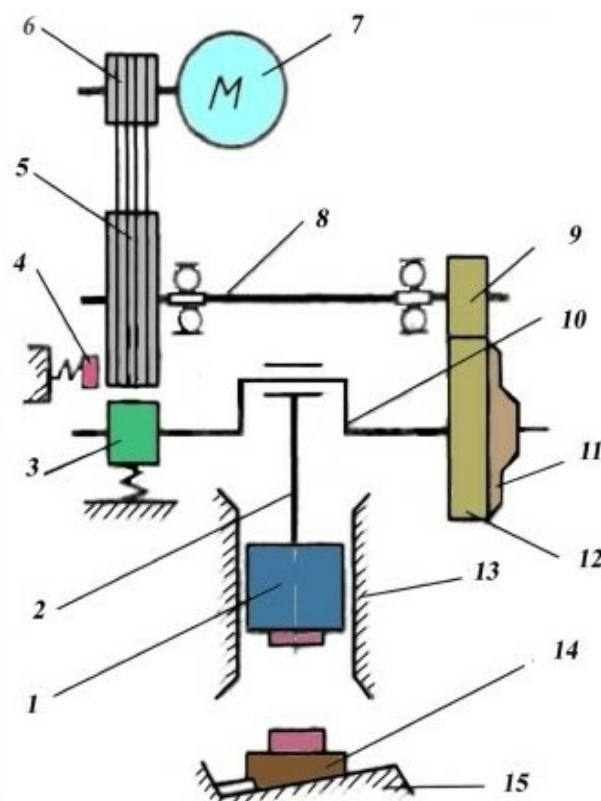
Structure scheme of crank press: 1 - slider, 2 - connecting rod, 3 - slider-crank mechanism brake, 4 - flywheel brake, 5 - flywheel, 6 - pulley, 7 - electric motor, 8 - drive shaft, 9 - drive gear, 10 - crankshaft, 11 - start clutch, 12 - driven gear, 13 - slide guides, 14 - wedge table, 15 - press base.
